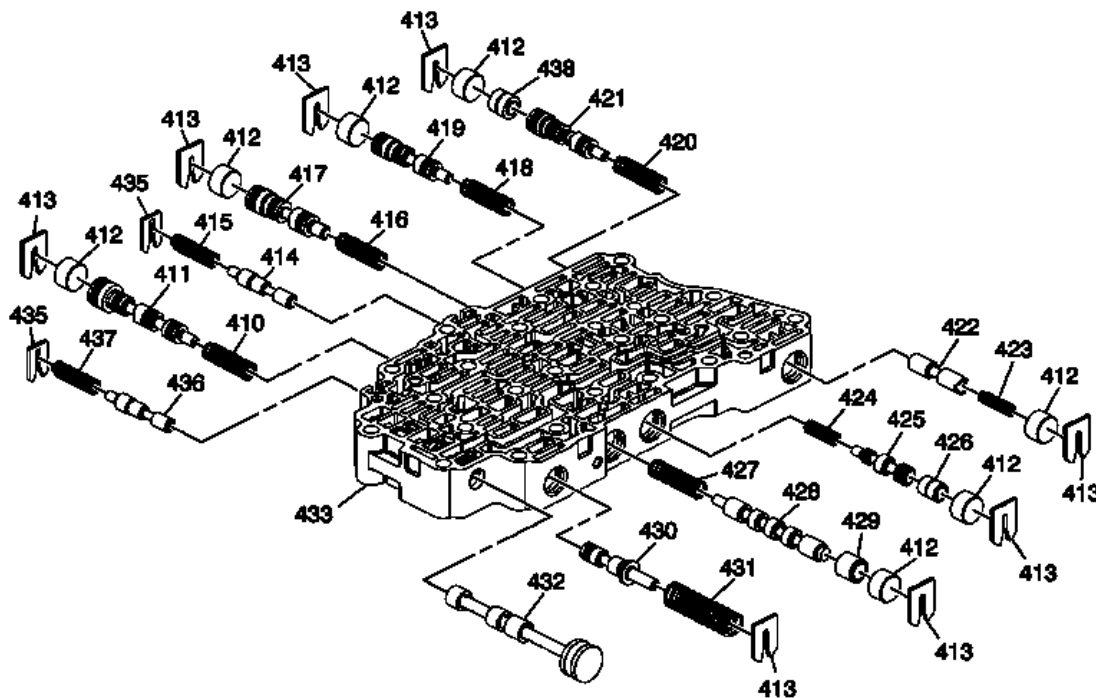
Control Valve Body Assembly -- Gen 2 (2 Of 2)
